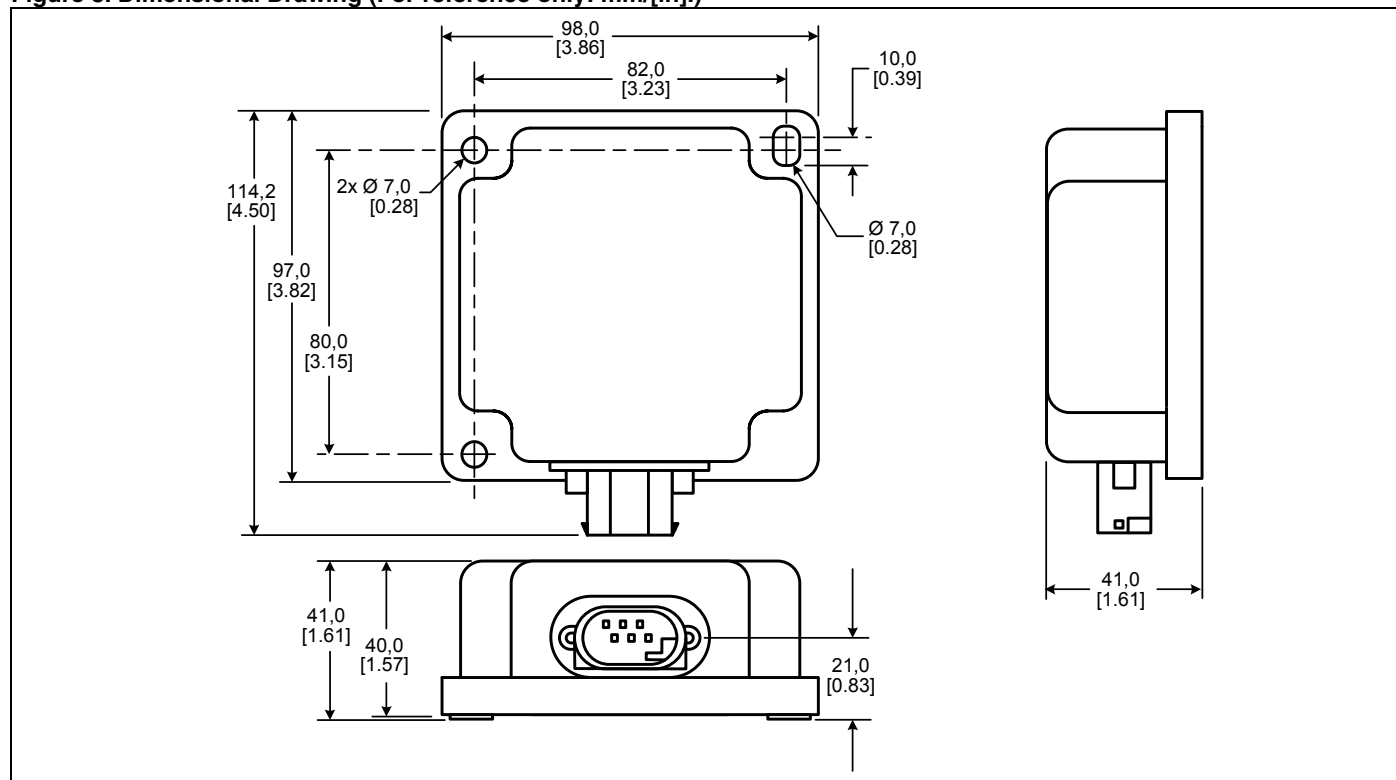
Dimensional Drawing (For reference only: mm/[in].)
